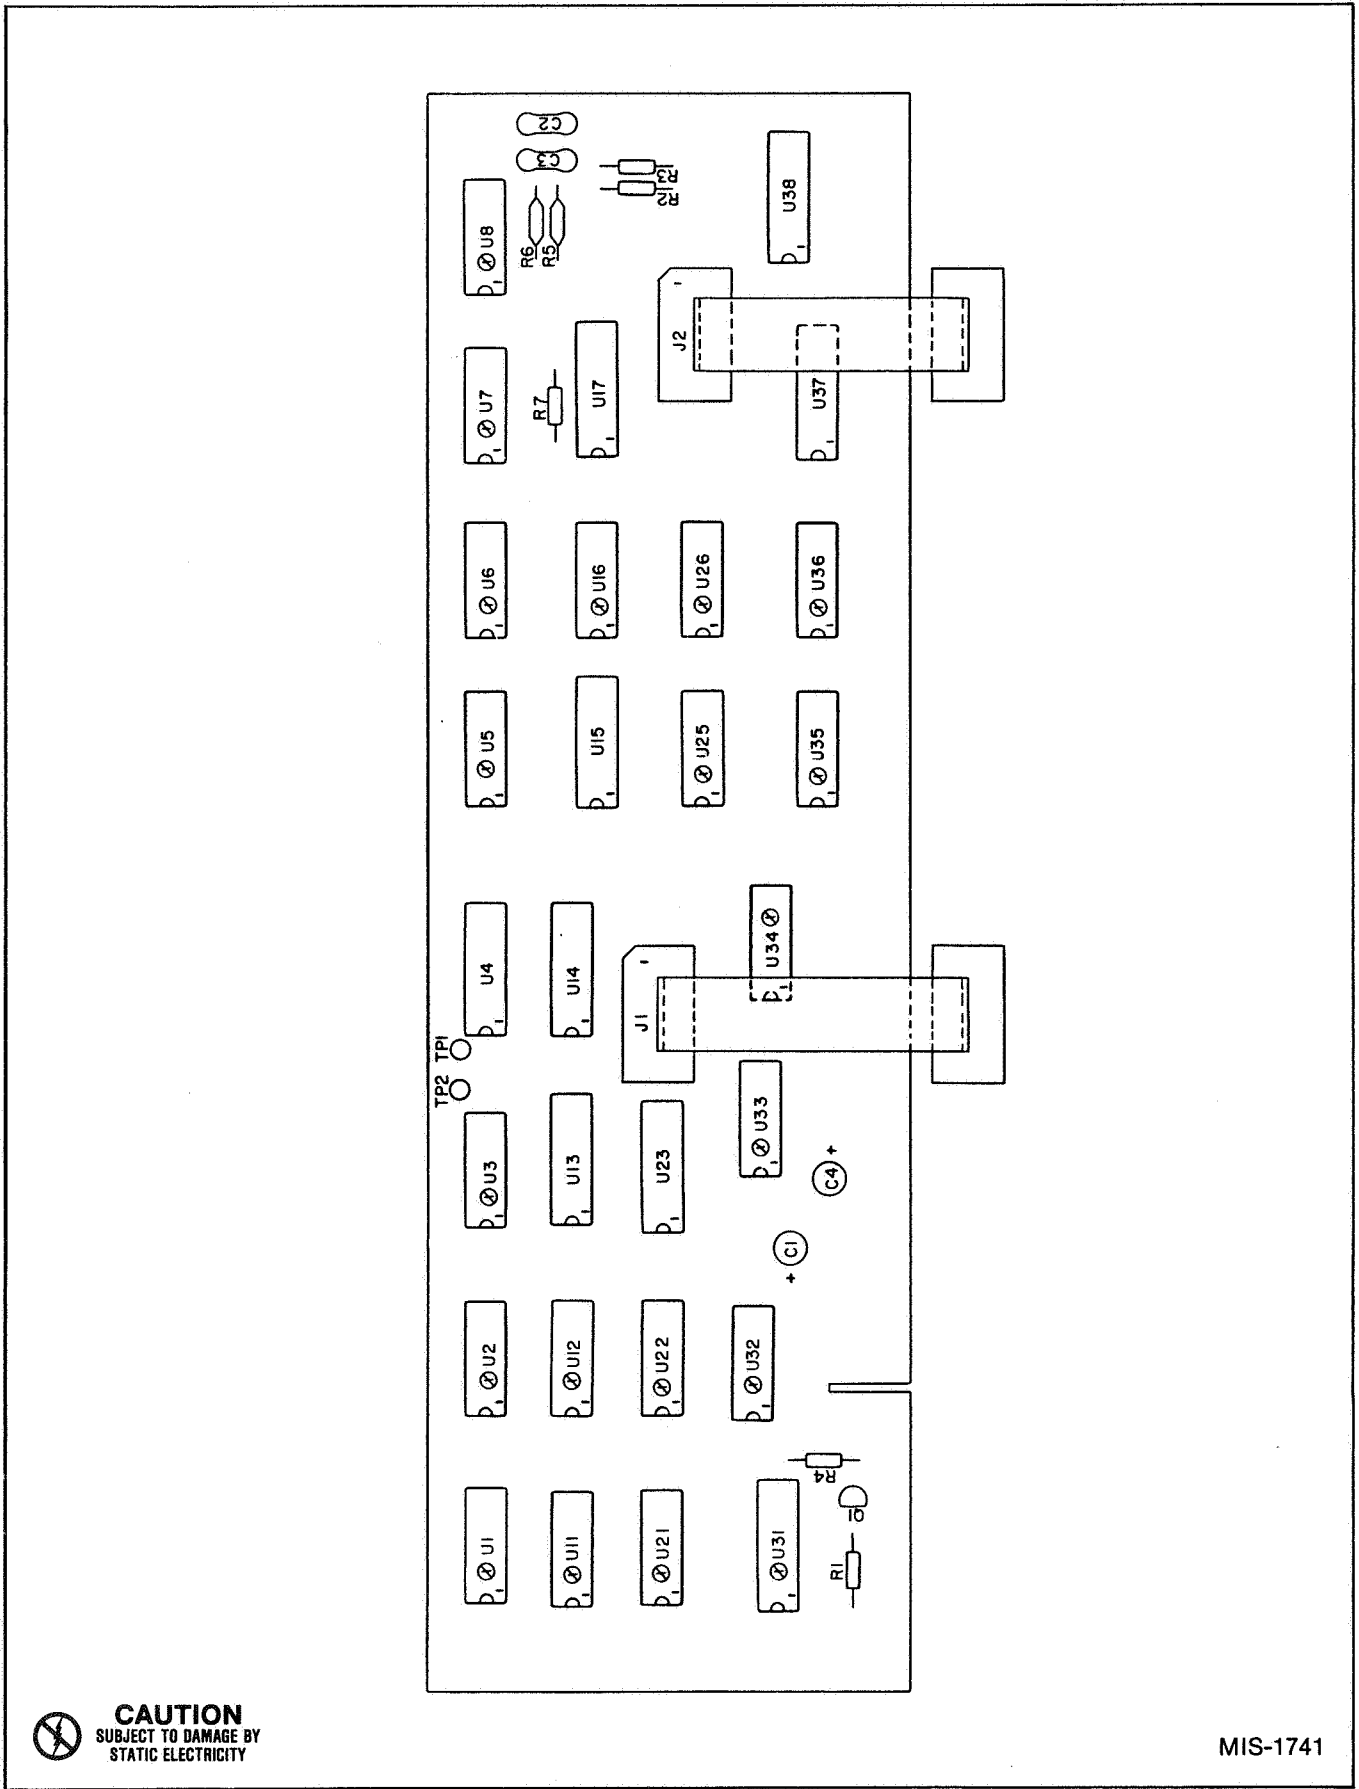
A10A2 Fast R<sup>2</sup> A/D Digital PCB Assembly
